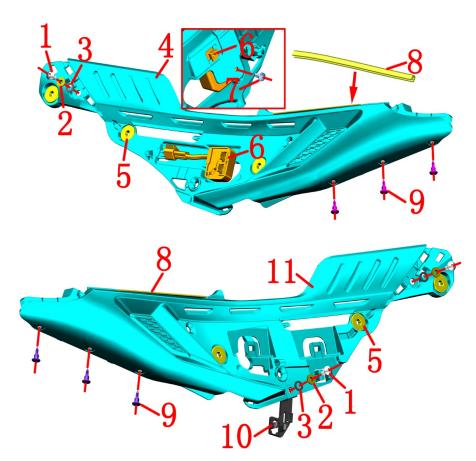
SI	DE COVER	Side cover component 3	CHK	401
